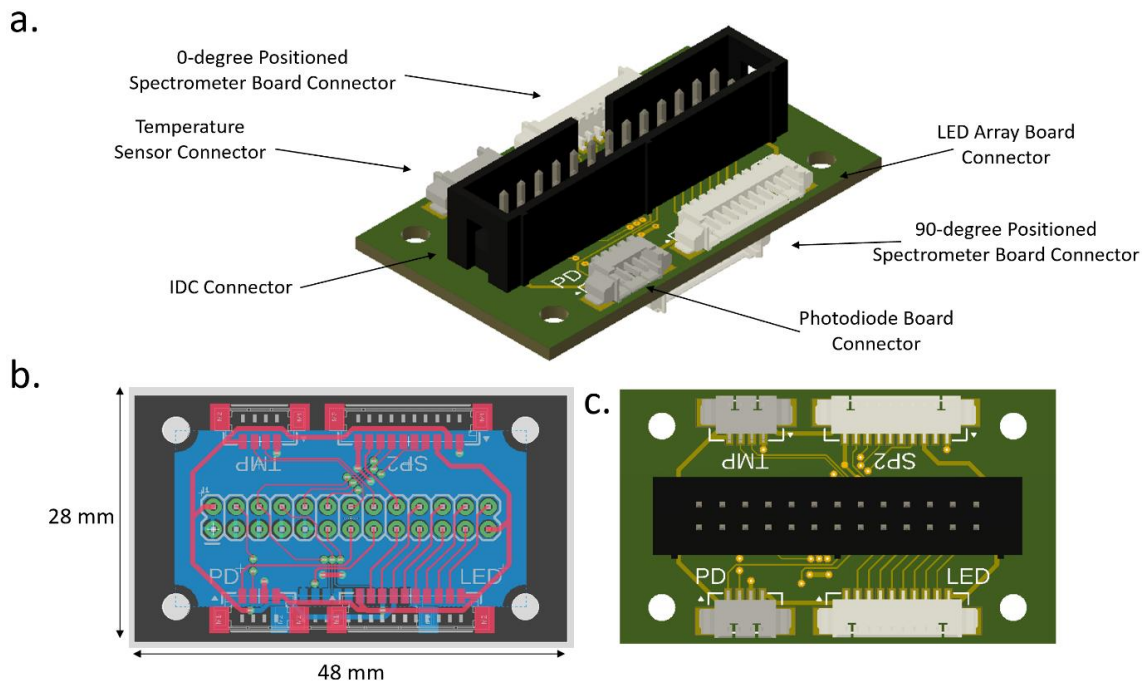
Design layout of the connector circuit board. (a) 3D labelled model view of the connector board design. (b) Dimensioned PCB layout top layer view showing layout, component placement, trace routing and copper power planes. (c) 3D model top view of PCB.
